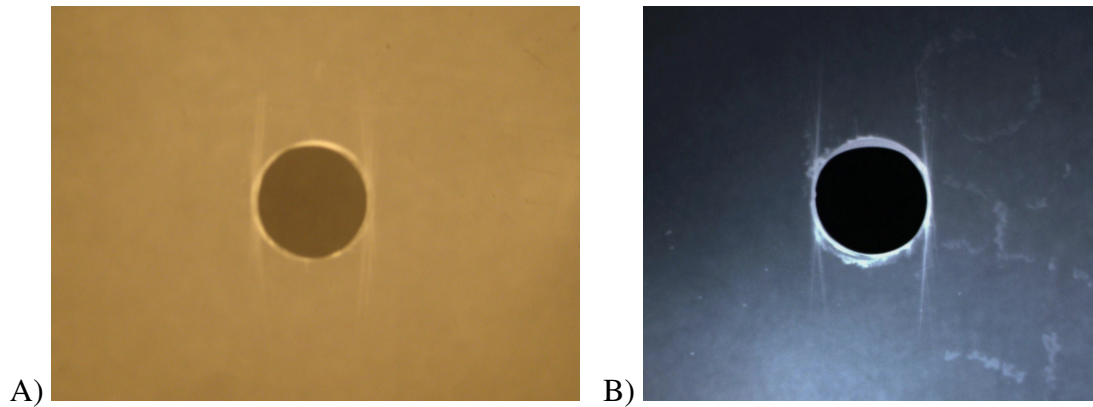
Radiographic images around 6.35mm diameter notch after 1 million cycles at max stress Compression for a) Open Hole specimen, b) Filled Hole specimen
